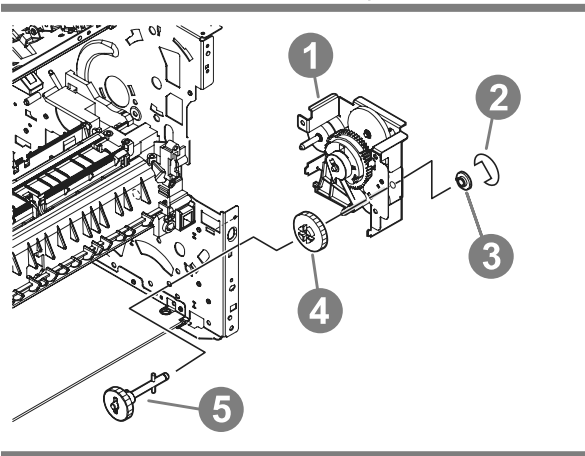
Remove the pickup-drive assembly (7 of 7)
